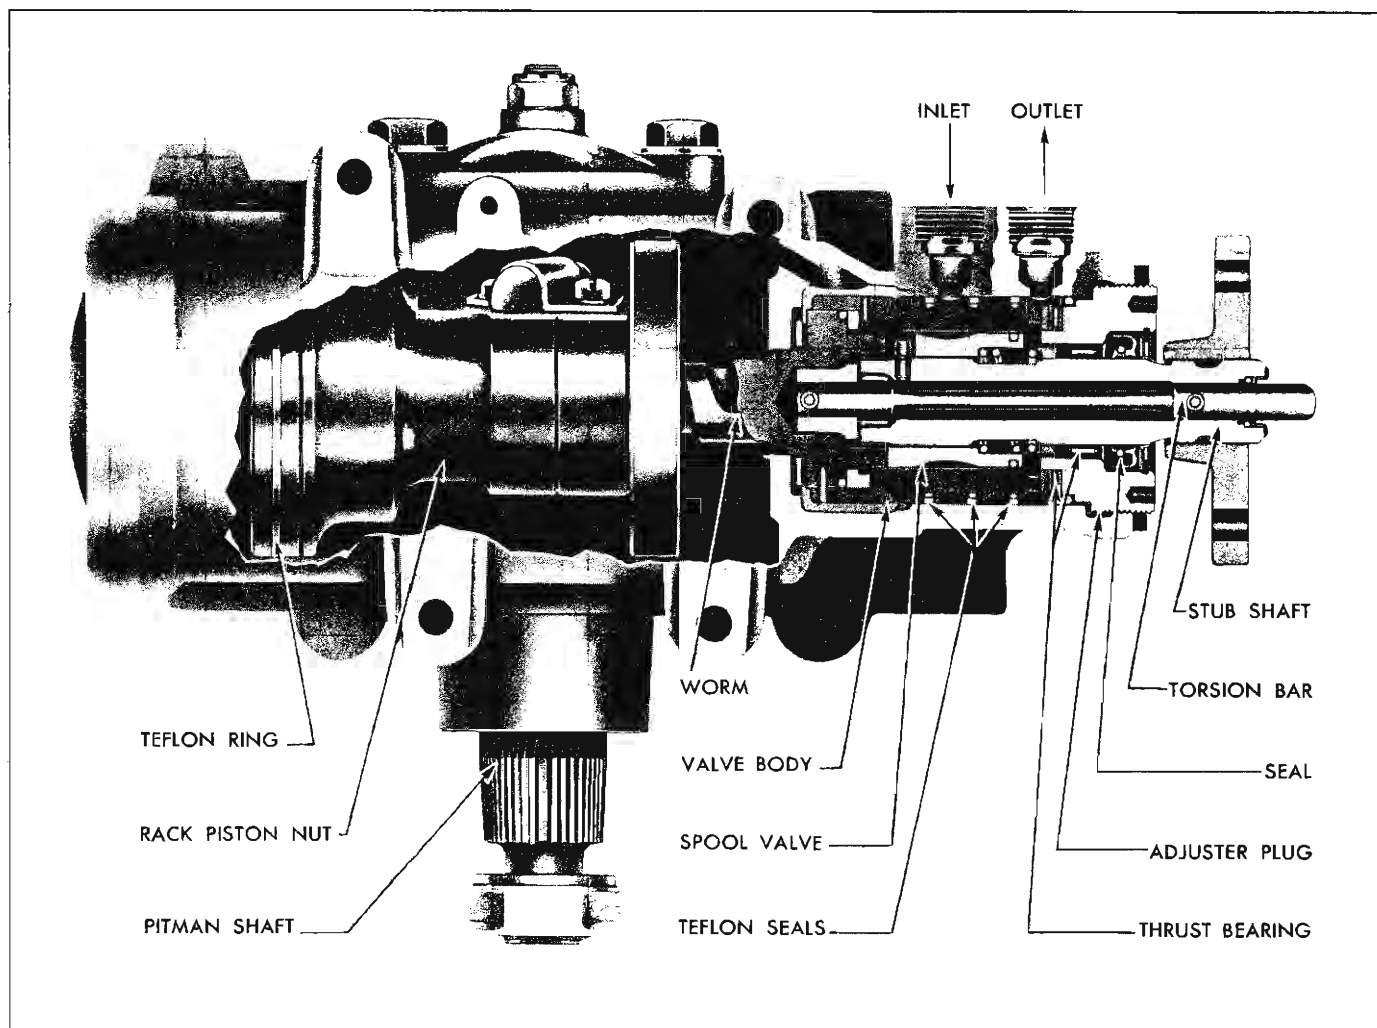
Power Steering Gear (Chevrolet and Chevelle)
